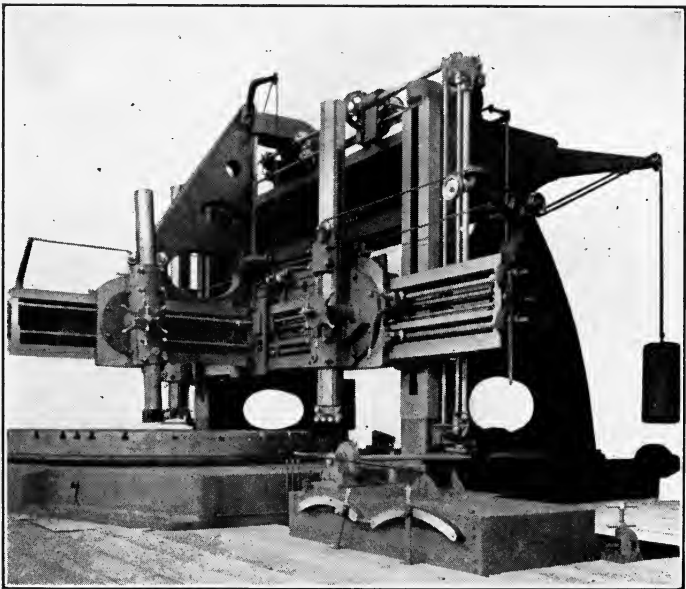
Sixteen-twenty-foot extension boring mill.
